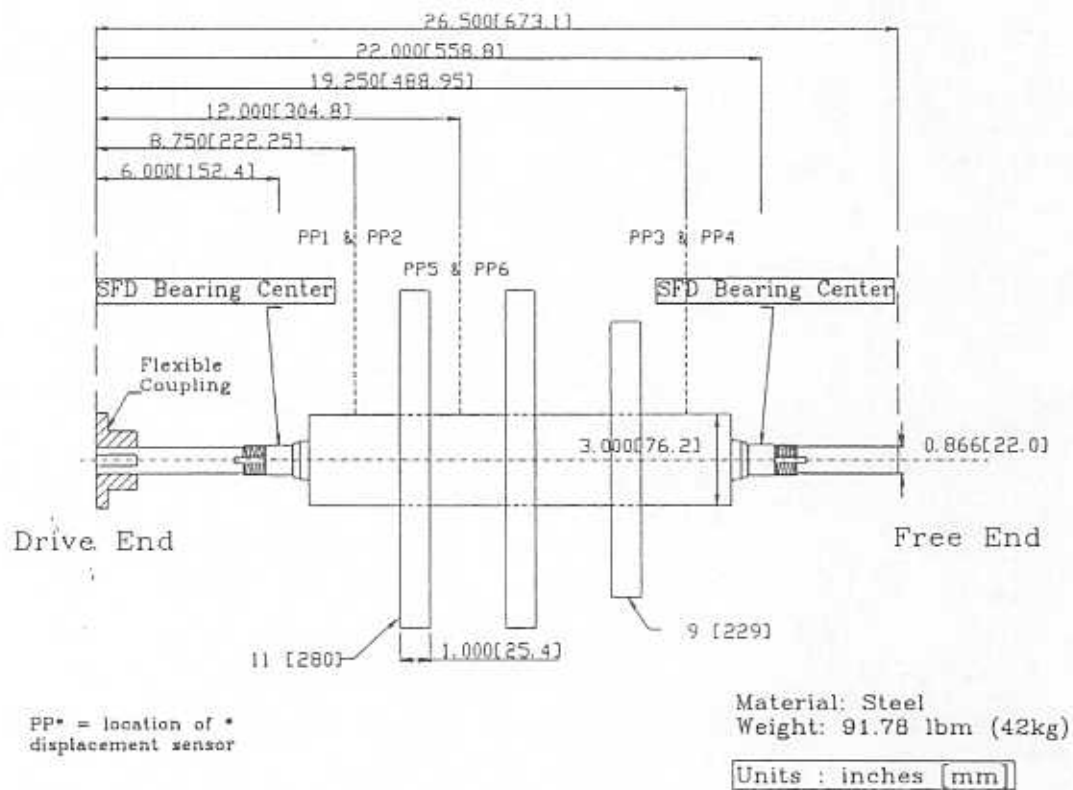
Test rotor dimensions and distances to bearing supports and displacement sensors.
